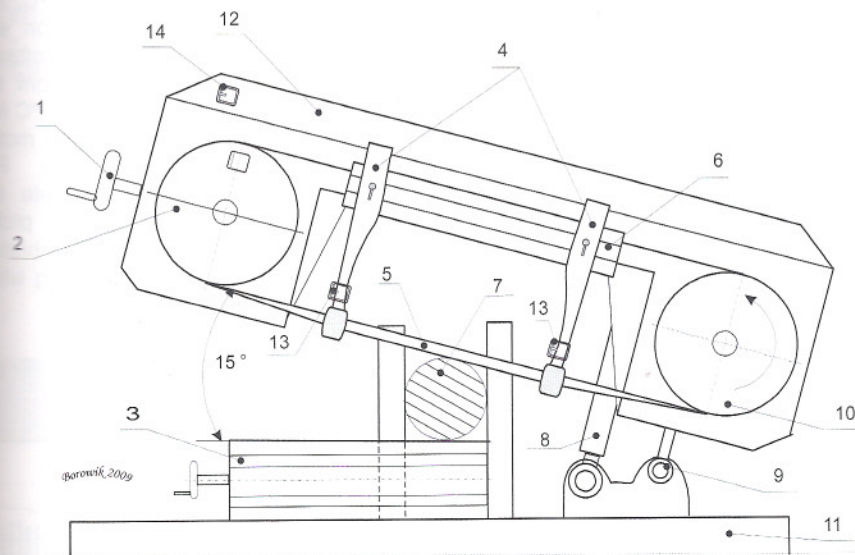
Identification of Basic Cutting Bandsaw Parts during operations: Blade tightening screw (1), Stretching wheel (2), Assembling clamping block (3), Stationery blade guard (4), Blade (5), Support of blade guard (6), Material to be cut (7), Hydraulic linear motor (8), Head frame pulley (9), Active wheel (10), Frame of cutting bandsaw (11), Head of cutting bandsaw (12), Accelerometer sensors gathering the impulse burden (13), Tilt sensors gathering the head deflection data (14)
